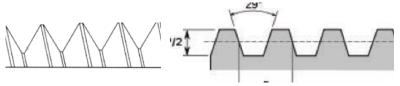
The left thread drawing are national pipe thread, the right drawing is an acme thread
